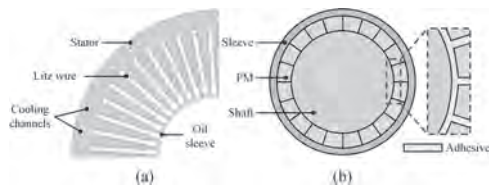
Cross-section of a 48-slot 4-pole high-speed PM machine. (a) Stator. (b) Rotor with segmented PMs
